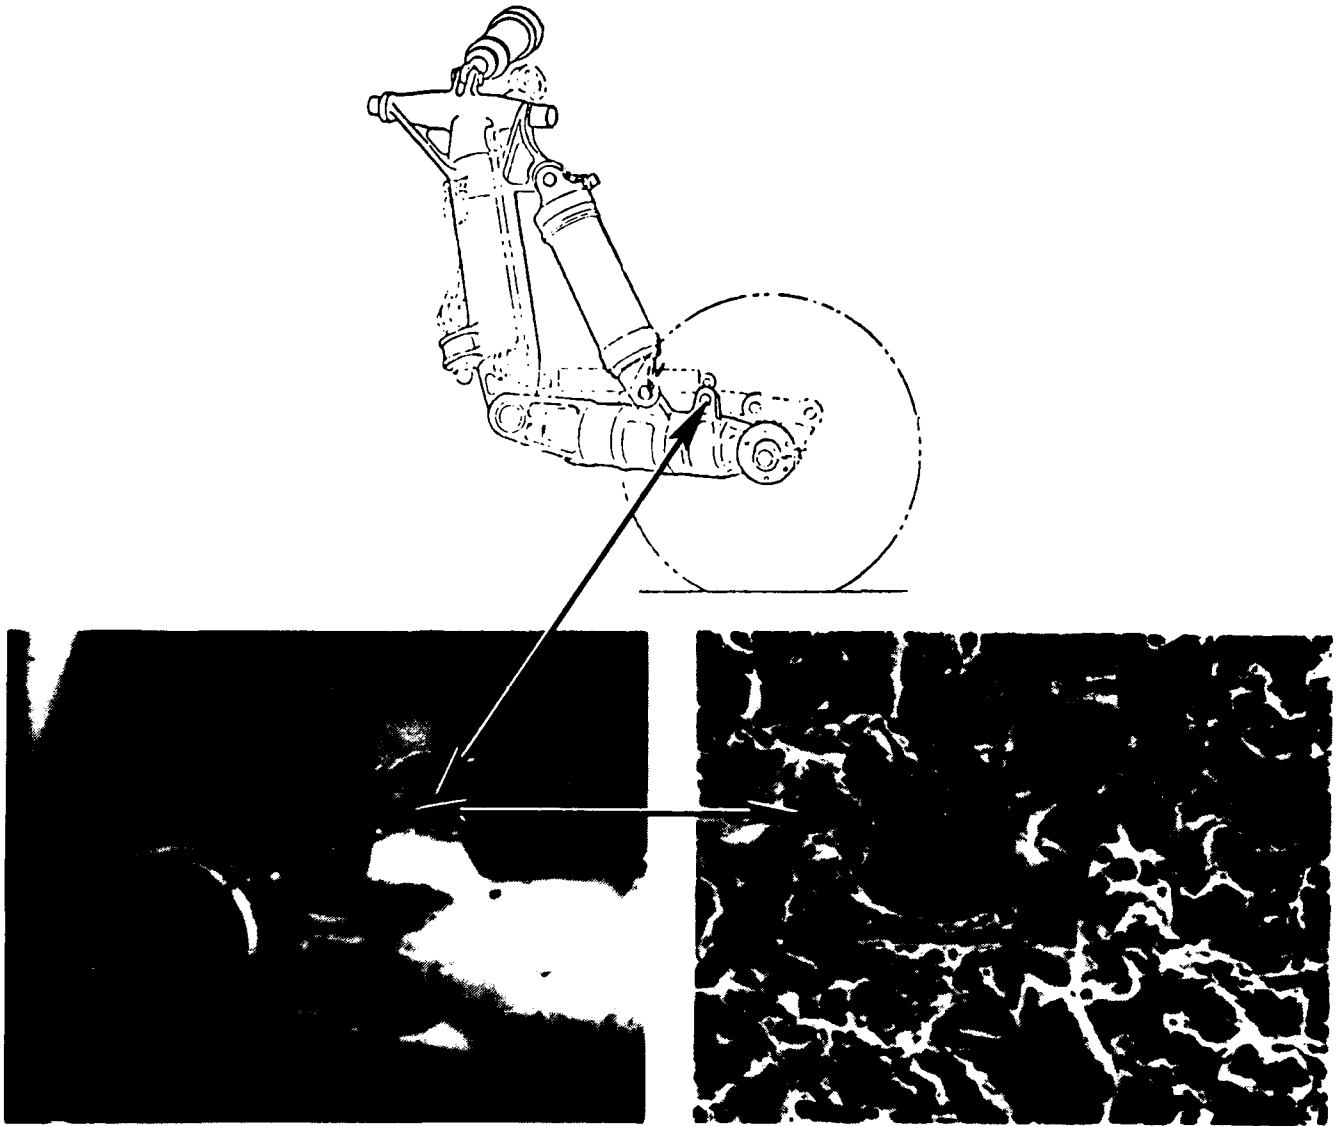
Navy F-18 main landing rear lug failure caused by hydrogen embrittlement. Fracture surface of 300 M steel lug in lower left photograph. (magnified 1000X)
